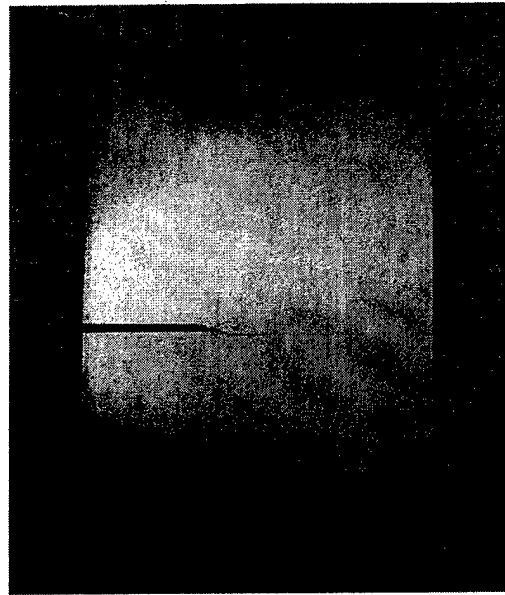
Edge cracked specimen EC2 with width $W=75$ mm
